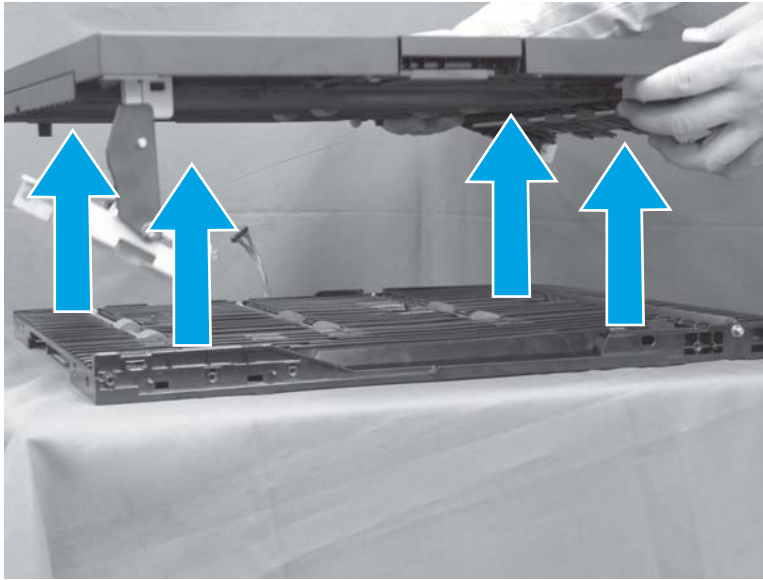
Remove the IPTU upper and lower guide assemblies (7 of 9)
